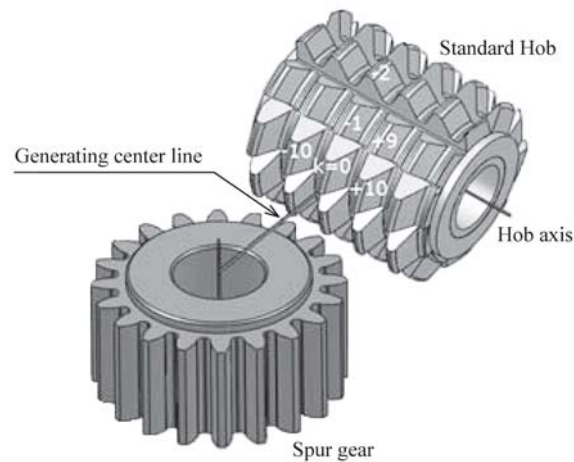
Cutting tooth number of 10 gashed hob and generating center line.
